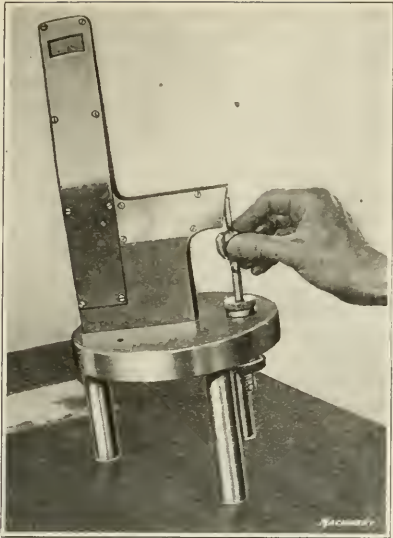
Indicating Gage for testing Balls during Process of Manufacture
